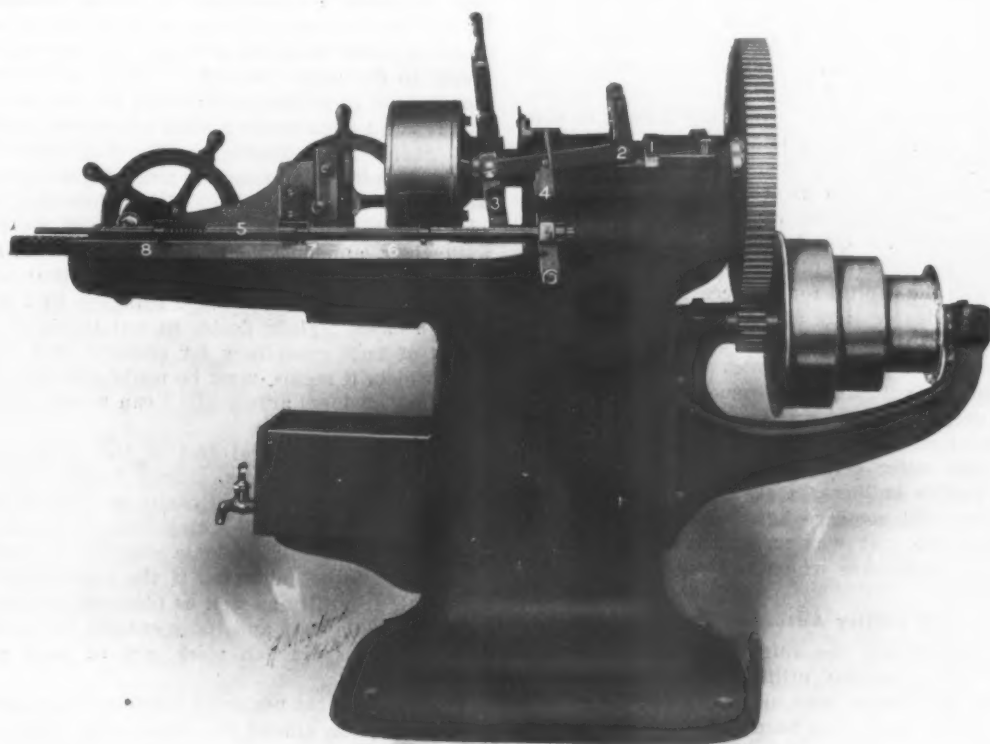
Rear View of No. 2 Bolt Cutter.
